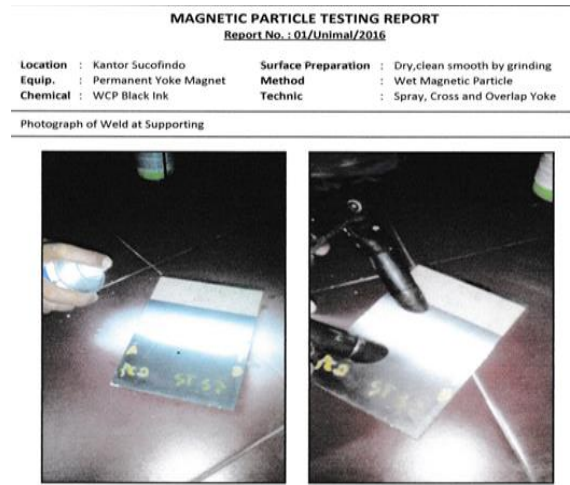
Examination of welding defects by the Magnetic Particle Testing method, Material ST 37 oil cooling medium
